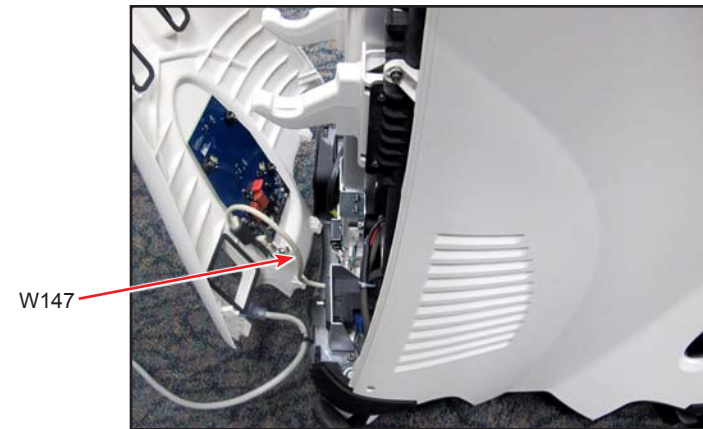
Cable W147 connecting Footswitch Charging PCB to MFIO PCBA
